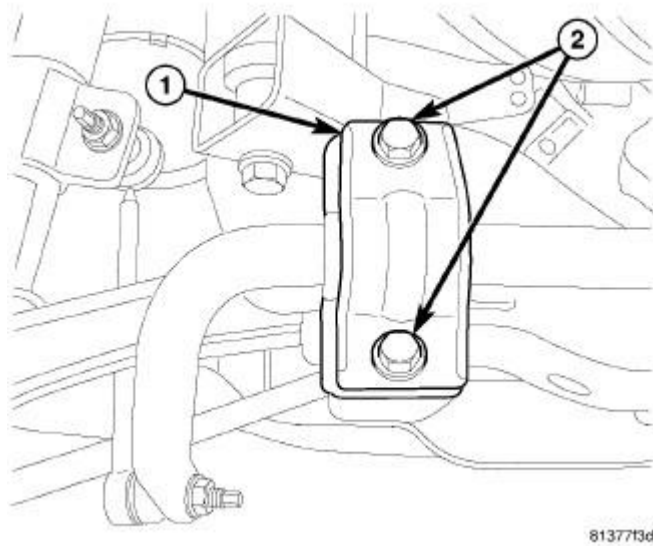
FRONT STABILIZER BAR BUSHING RETAINER BOLTS
